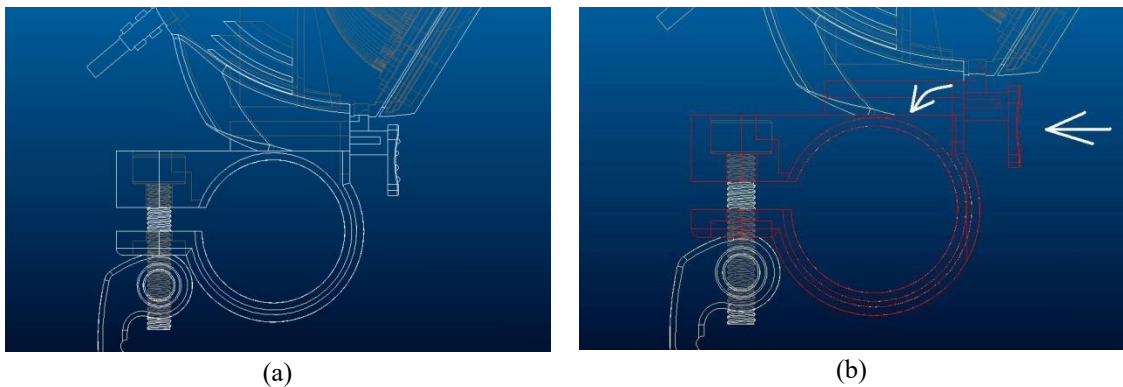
(a) Improved side view design drawing of quick-release screw for clip mounting bracket and (b) Side view schematic diagram of operating direction and slot position for front-activated clip mounting bracket.
